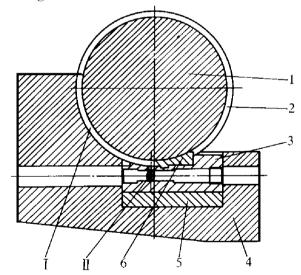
Mechanism of AS wire by Castex 1—Extrusion wheel; 2—Extrusion wheel groove; 3—Die container; 4—Shoe; 5—Bearer; 6—Abutment I—Castex stage; II—Bonding stage
